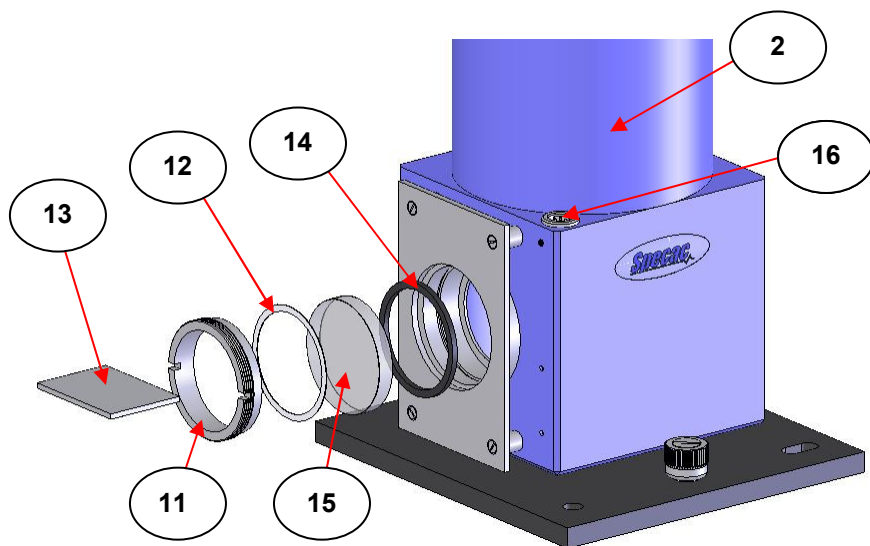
GS21525 Detail for Vacuum Jacket Window Assembly
